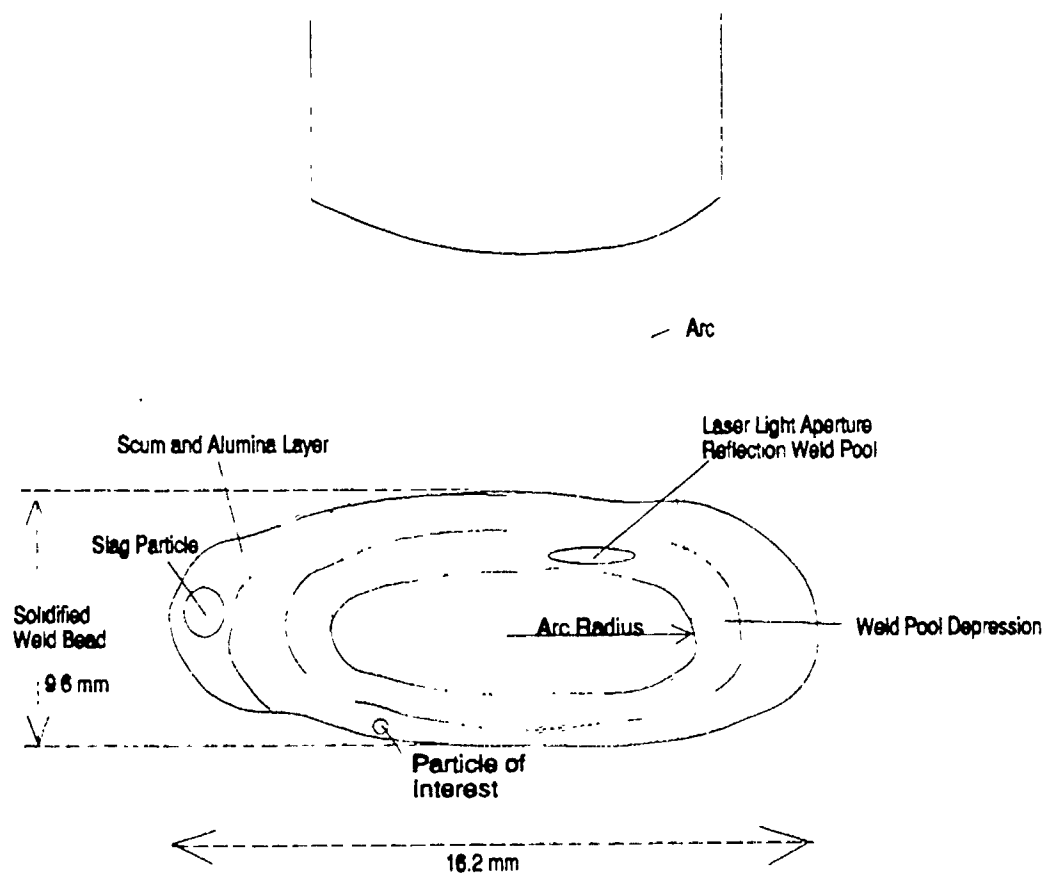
Weld Pool Flow. Time + .02 Seconds, 250 A, 14.2 v, Welding Speed 2.27 mm/sec. Enlargement x5.5.
